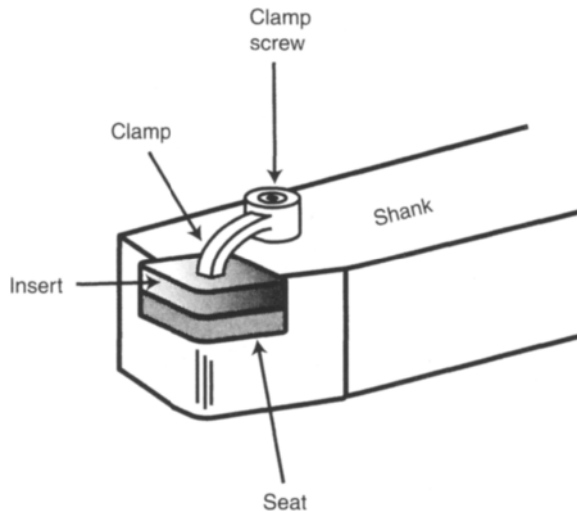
WC–Co insert clamped to a single-point tool.
